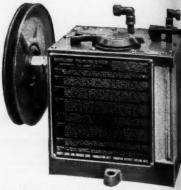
Style 1 pumping unit with sheave for V-belt drive.
